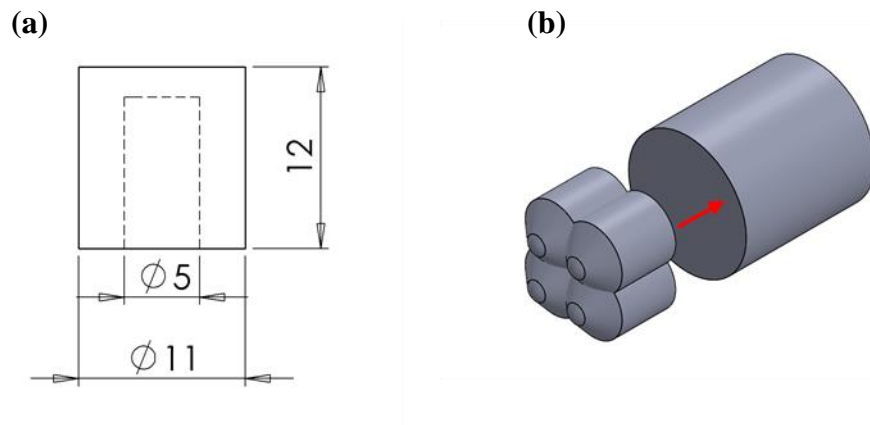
Base used to attach the crowns to the universal testing machine. A base was sketched, which included a hole at the bottom in which a M6 internal thread could be tapped (a). This was then merged with each crown to create an assembled model (b). Measurements in mm. Diagram scaled 2:1.
